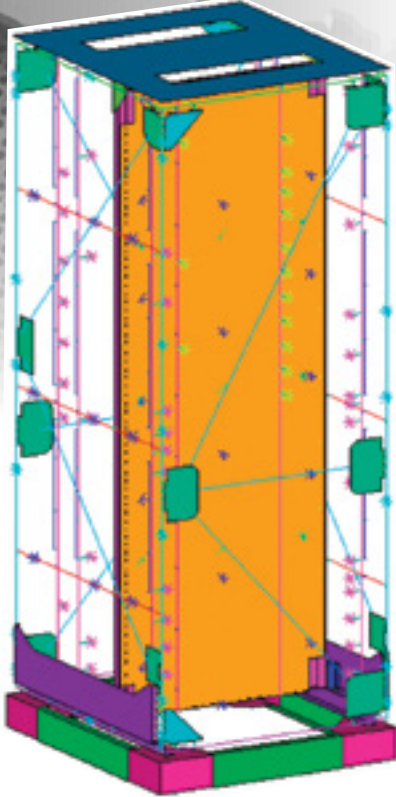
Typical Floor-mounted Cabinet Finite Element Model
